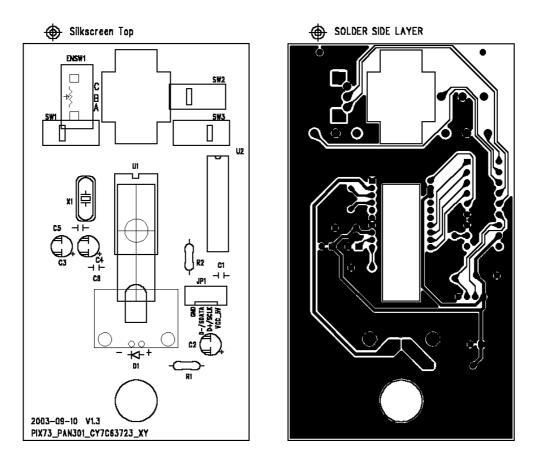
Example printed circuit board layout. (PAN301ASI-20X V.S CY7C63723-PC)
